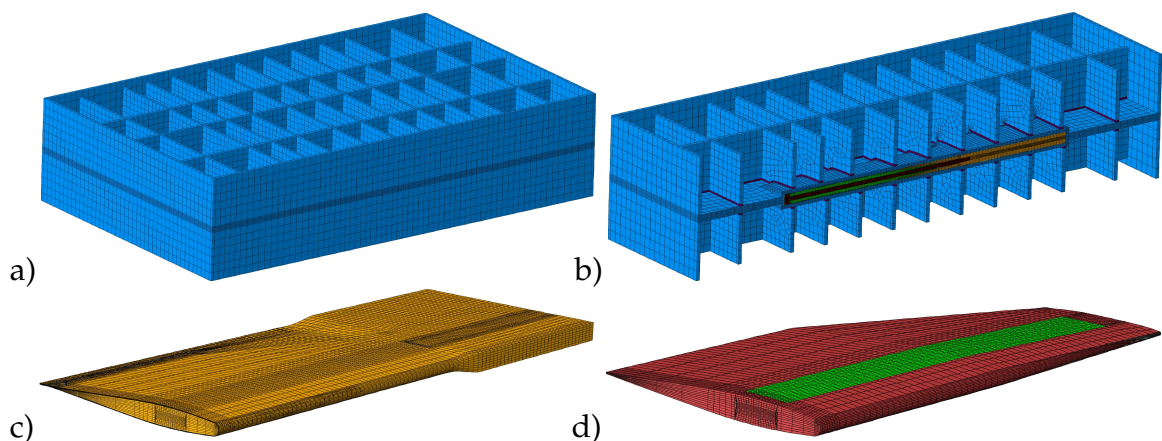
Simulation model of the generic rotor blade and the CFRP tool: (a) Finite element discretization of the tool, (b) cross-section through the tool and part, (c) FE mesh of the curing CFRP rotor blade (yellow) and (d) foam core (red) and curing GFRP spar (green) of the simulation model.
